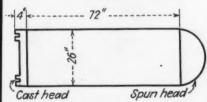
Aluminum tank with a cast head and spun head welded to an aluminum tube.
